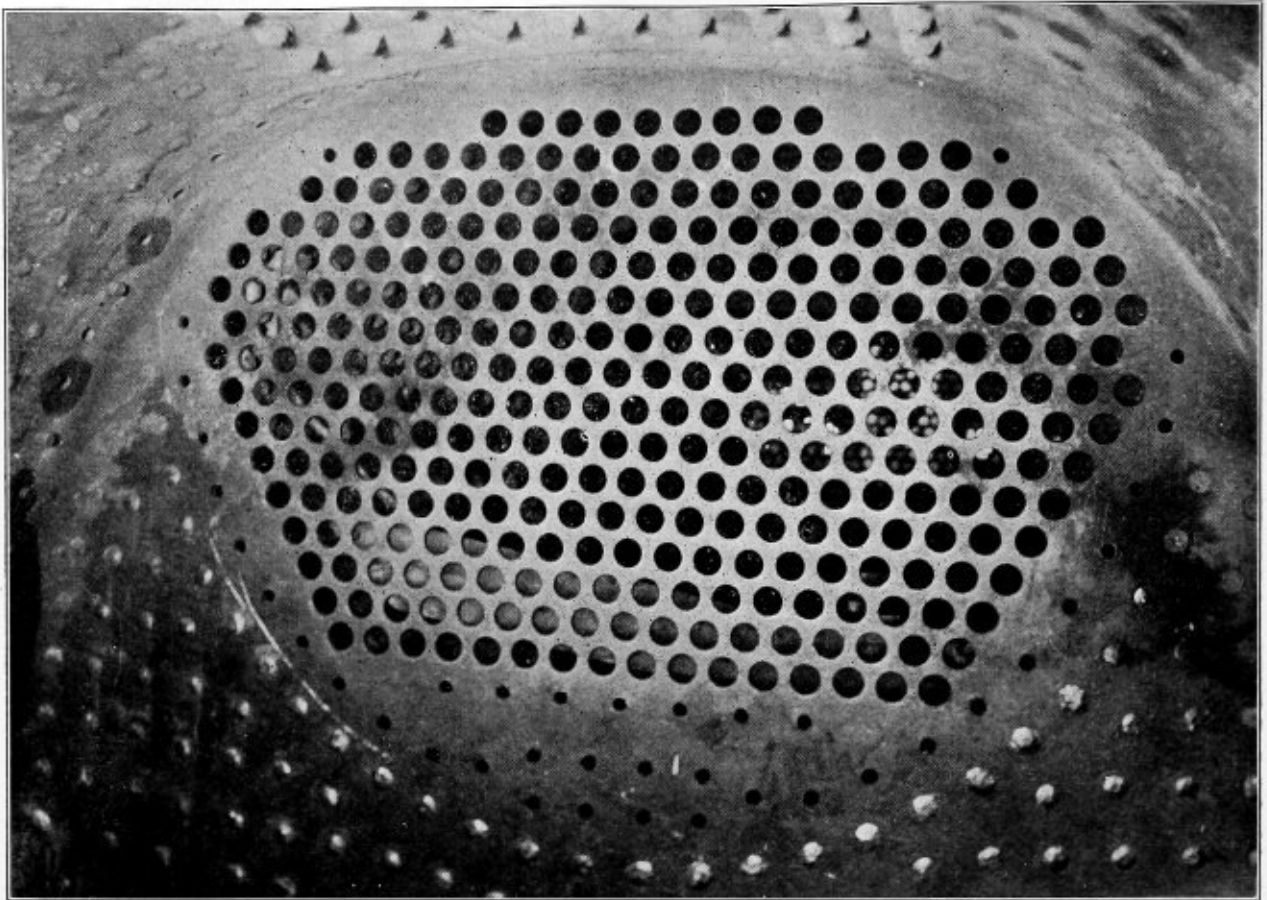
Flue Sheet Welded by the Oxy-Acetylene Process
